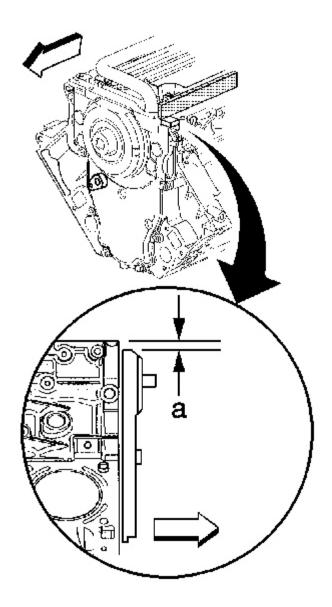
Measuring Oil Pan Surface Flatness & Front Cover-To-Engine Block Courtesy of GENERAL MOTORS CORP.
